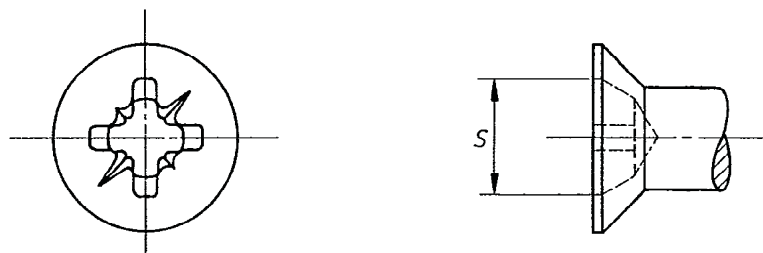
Recessed countersunk head machine screws: enlarged views of recess type V
